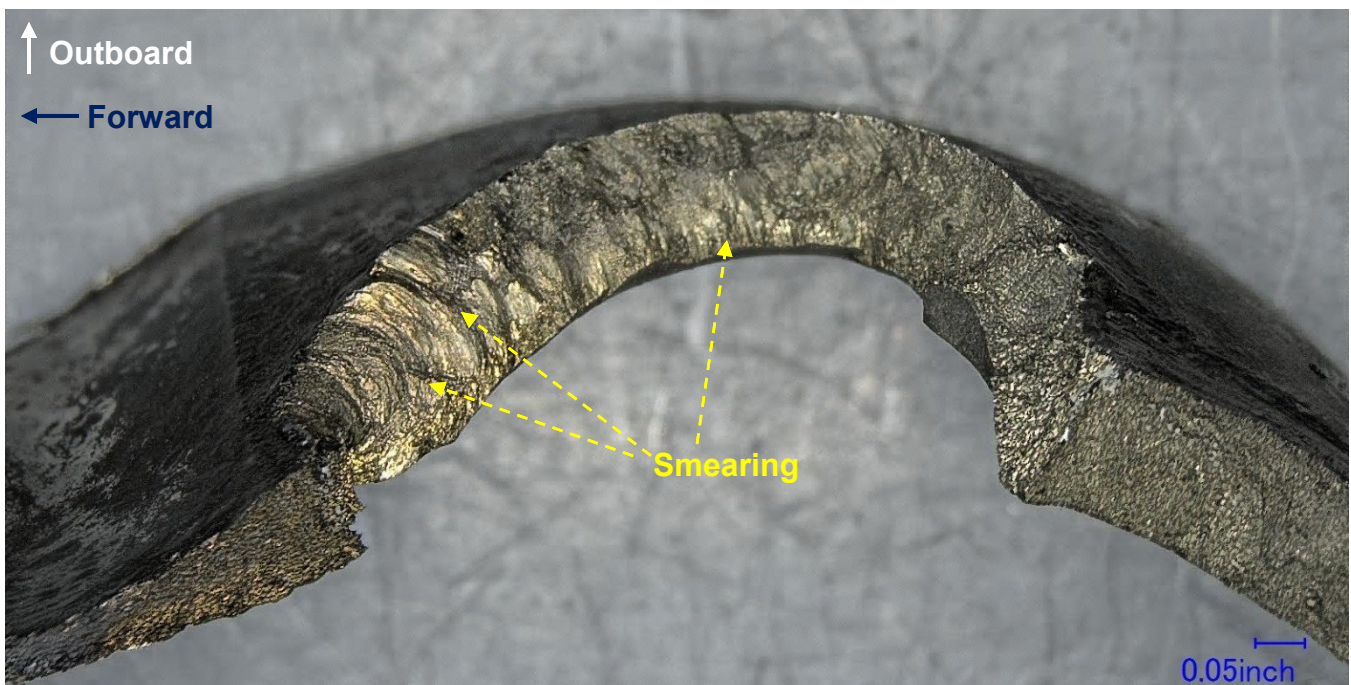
The hole-shaped portion of the fracture, after backcutting and opening. The hole-shaped portion exhibited shiny, smear marks.
